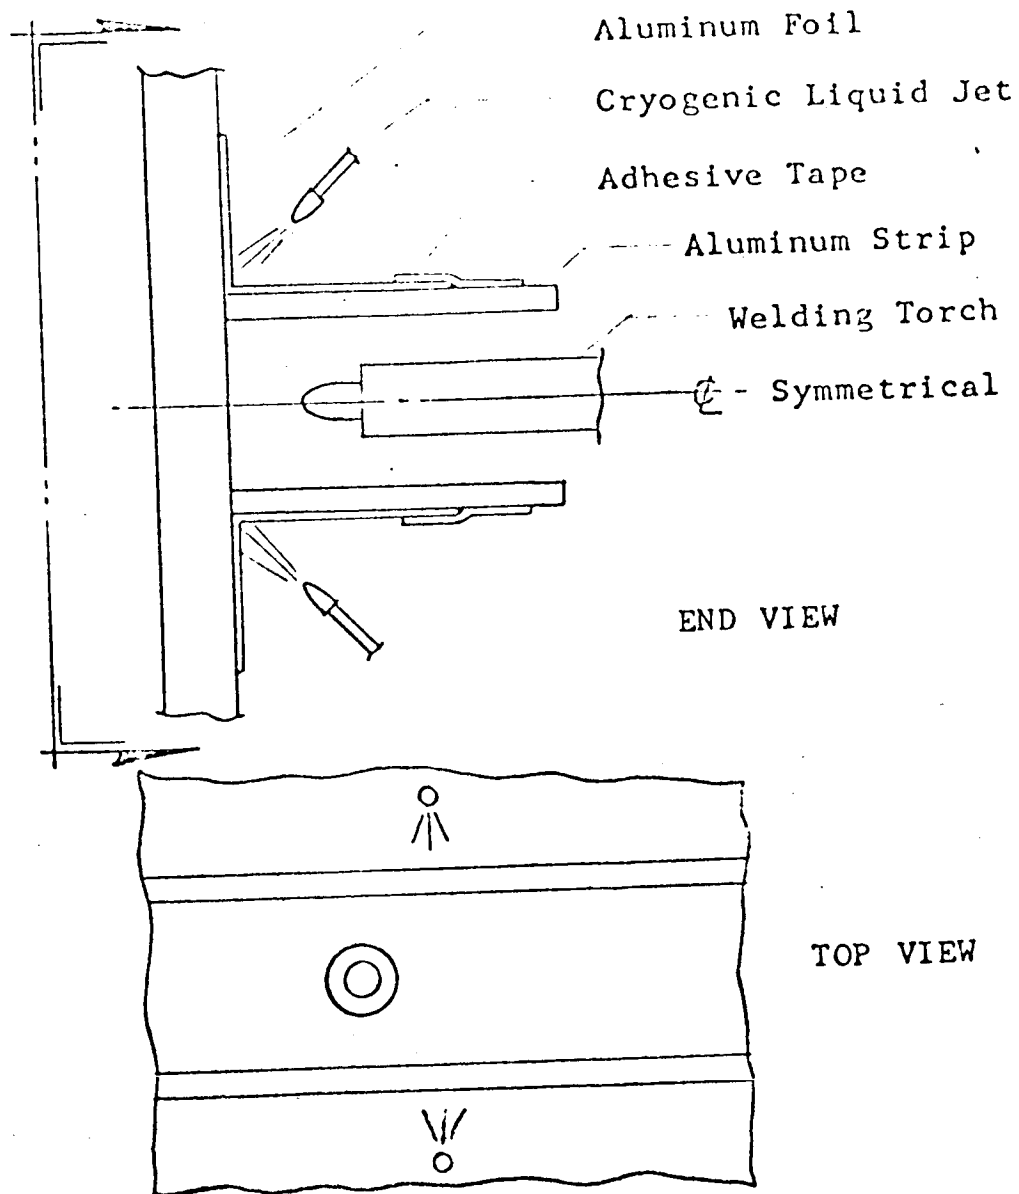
Jet System No. 1 for Front Side Chilling of Weldments using a Cryogenic Liquid — Stationary Shield with Metal Foil Seal
